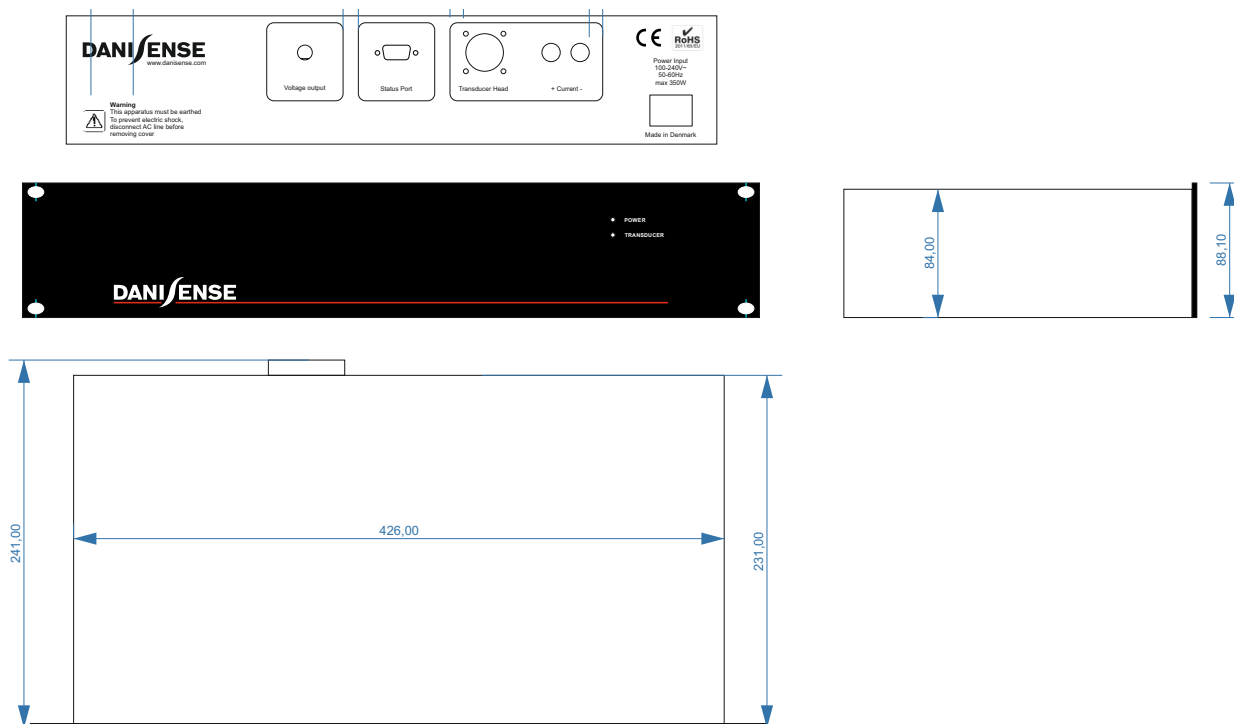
Dimensions of electronics control box. 0.3 mm general tolerance
